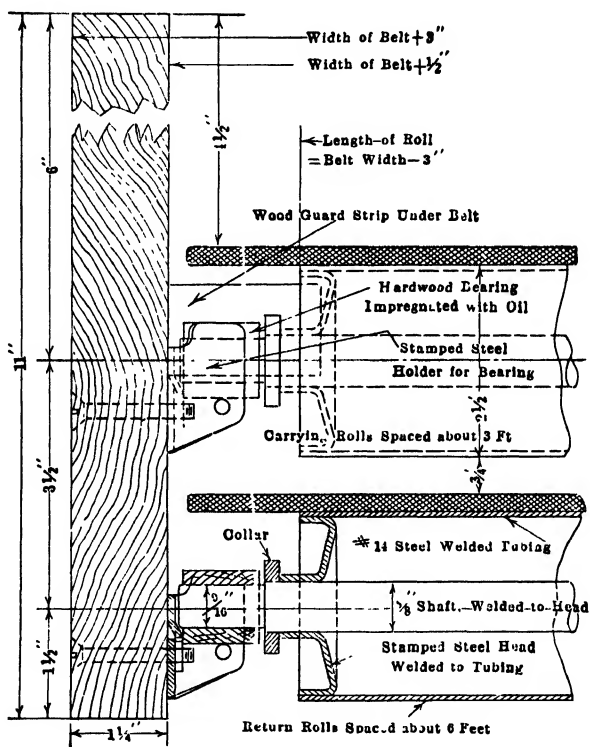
Package Conveyor, Wood Frame, and Oilless Bearings. (Lamson Company.)
